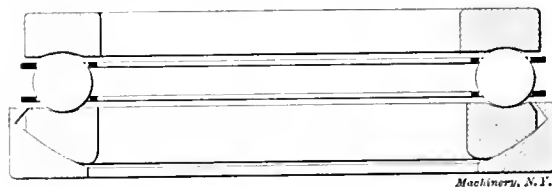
Section through Thrust Bearing, the Lower Race of which is in Two Parts
